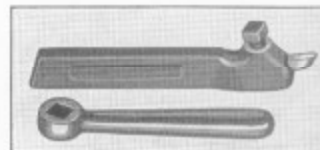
Straight shank turning tool holder fitted with a ground cutter bit.
